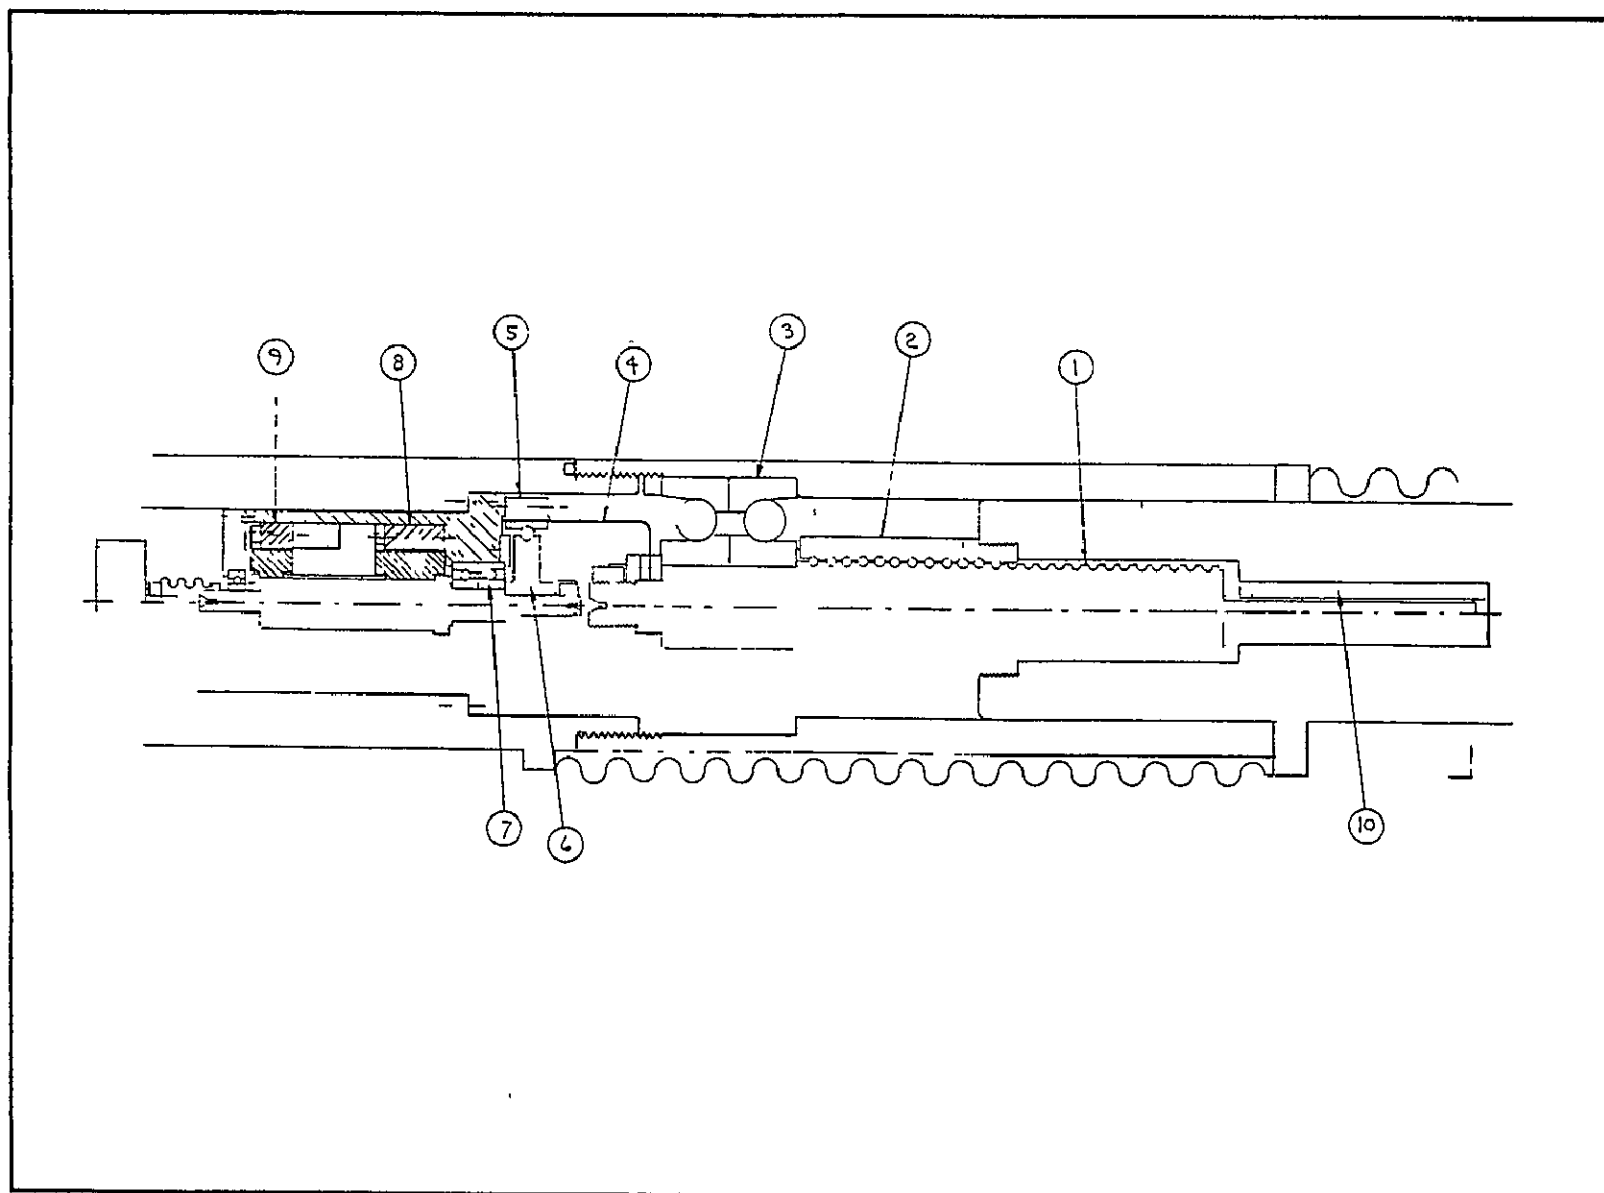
Actuator with ball-bearing screw, rotary harmonic drive and torque motor
